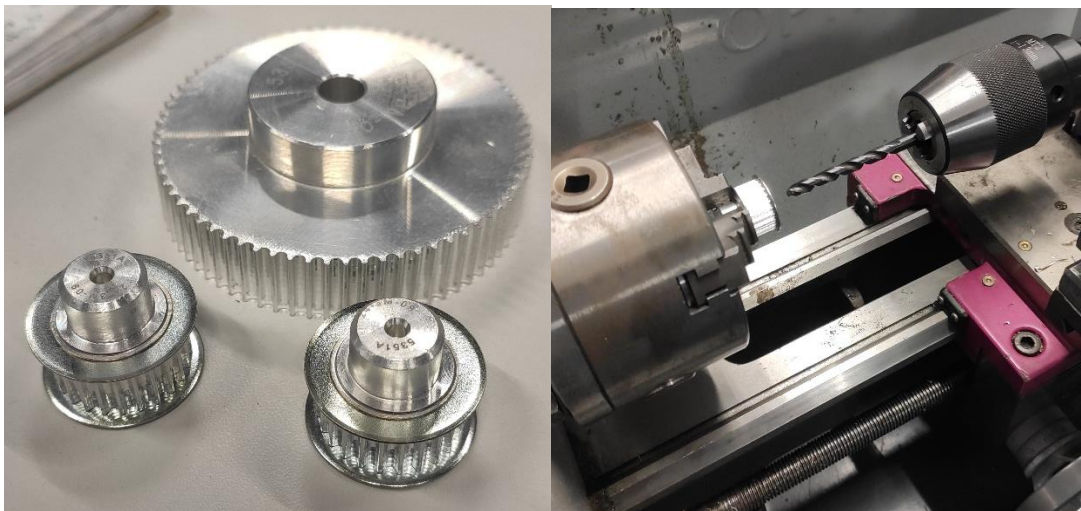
Timing belt pulleys and pulley centre hole drilling setup
